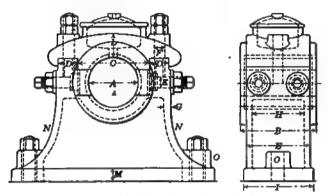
Heavy pedestal bearings with table of dimensions.
